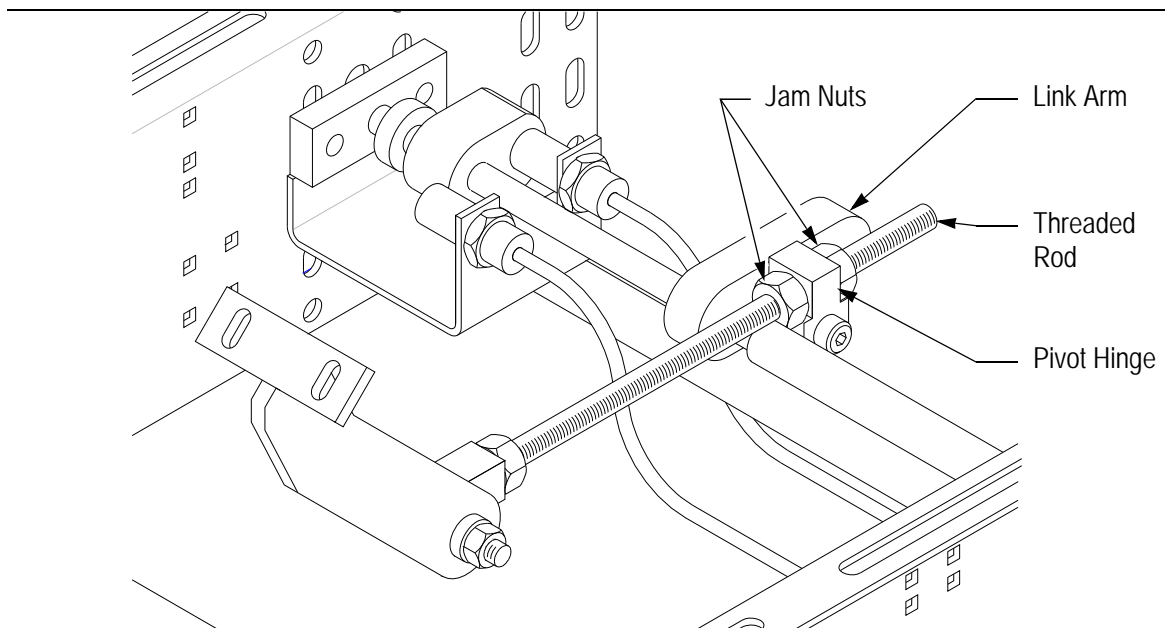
Adjusting Linkage – Hand- & Foot-Operated Case Stops
